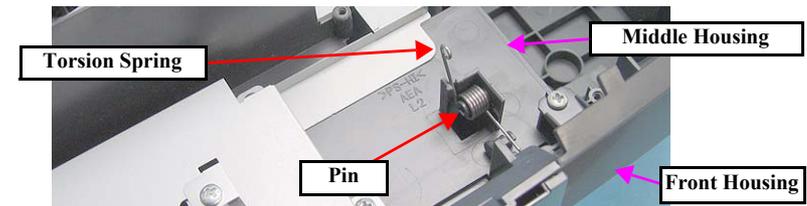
Removing the Torsion Spring (R360/R380/R390 only)
